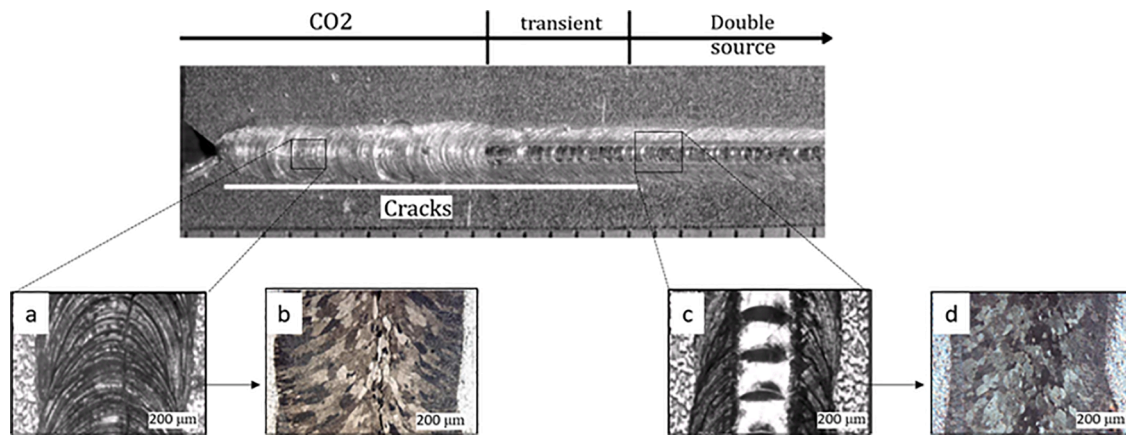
a) Laser welding with CO<sub>2</sub> laser, b) Solidification crack along columnar grains, c) double source welding, d) crack-free weld due to the higher permeability in the equiaxed grains (Drezet et al., 2008).
